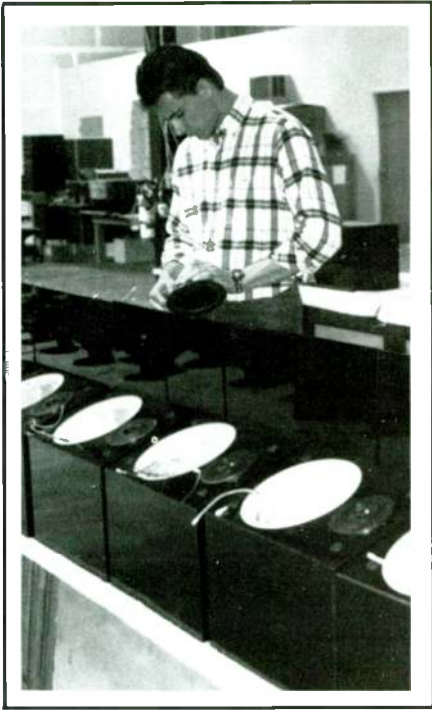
Installation of drivers in Model 1 boxes at the NHT plant.
